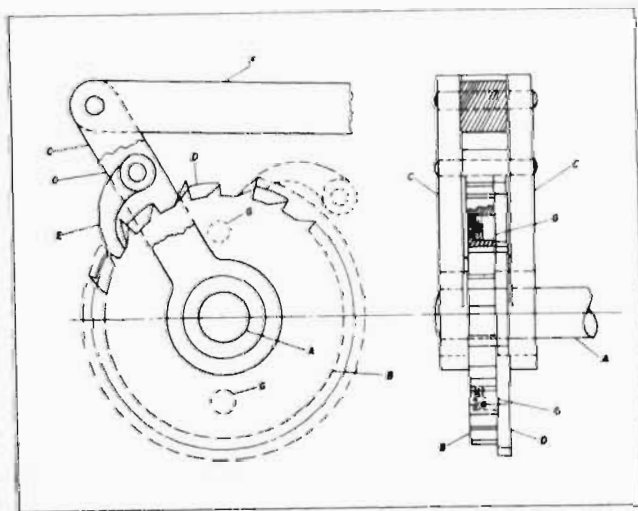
The design of the teeth of pilot wheel *D* keeps pawl *E* out of engagement with ratchet wheel *B* on alternate oscillations of levers *C*.
